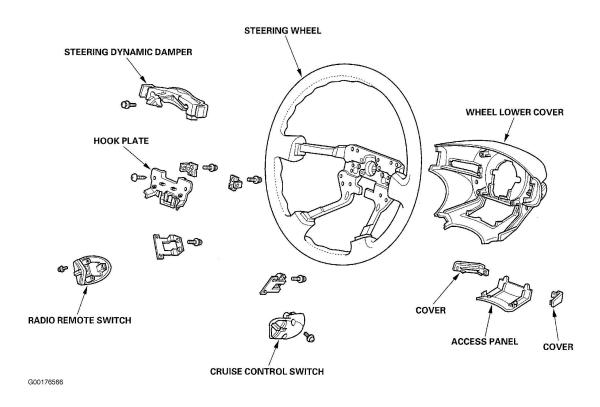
Exploded View Of Steering Wheel Disassembly/Reassembly (3.2CL & 3.2TL) Courtesy of AMERICAN HONDA MOTOR CO., INC.
